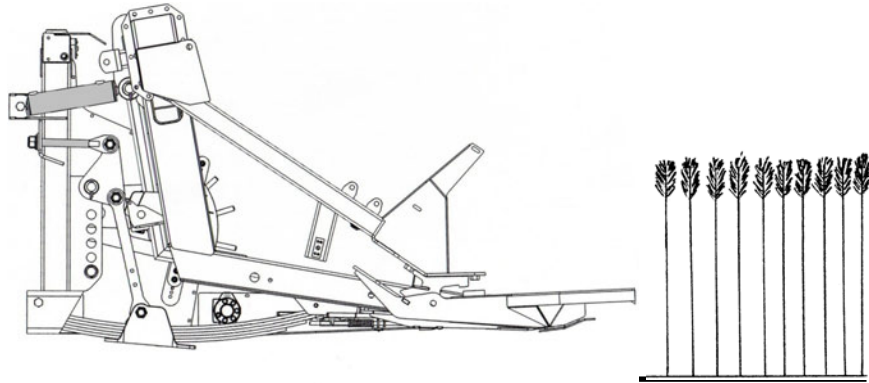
Adjuster Bolts Extended, Tilt Cylinders Retracted
